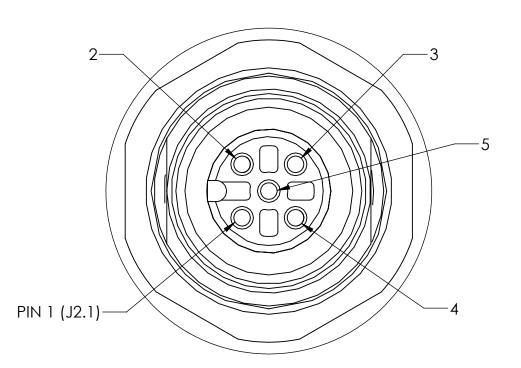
1 SHEET 3 ZONE E-3 SEE TABLE II FOR PINOUT DETAILS
